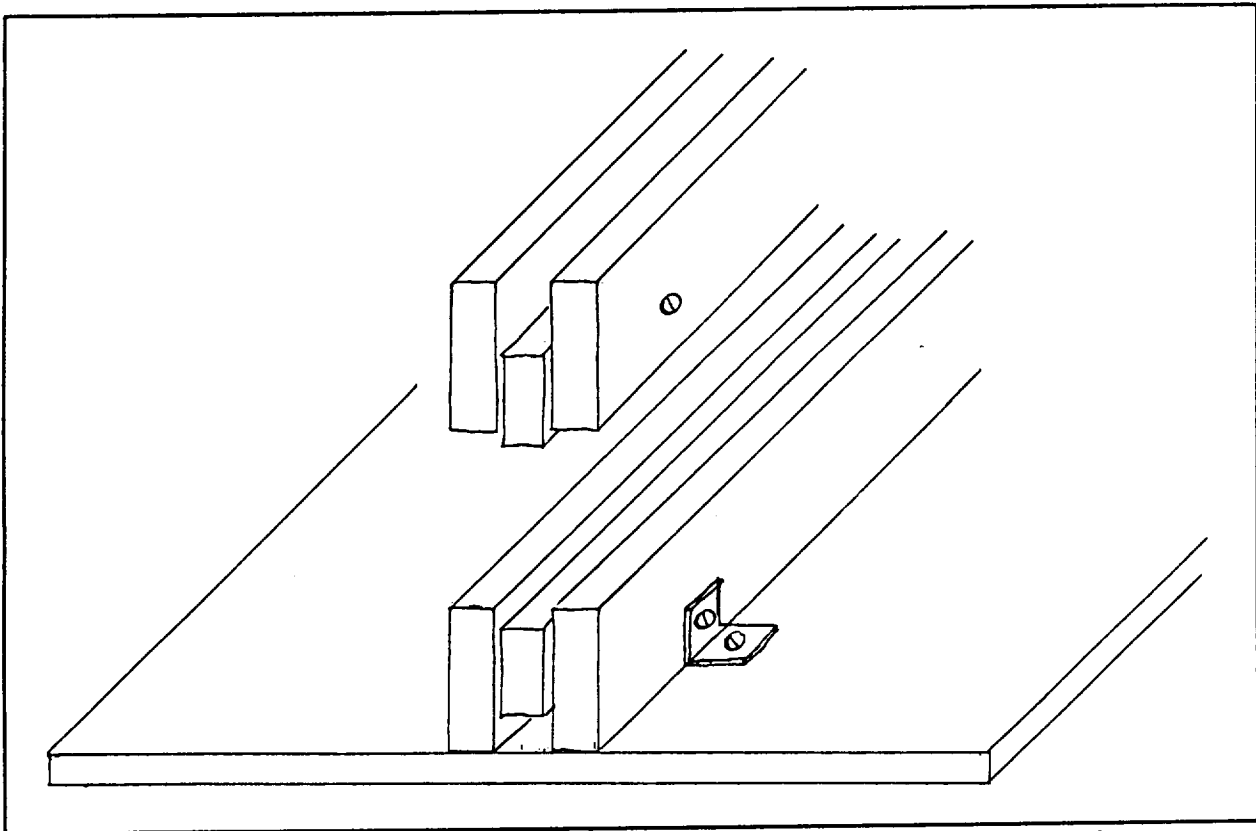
Cross Section of Initial Corrugating Tool (Similar to a Press Brake)
